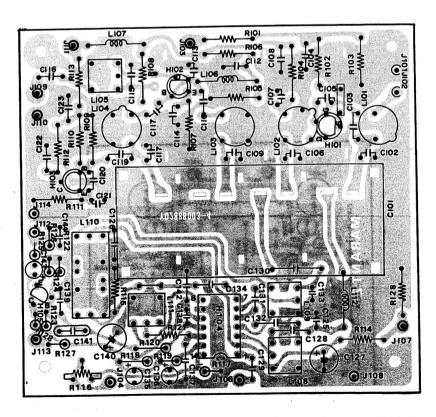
FM IF Amplifier, Detector, Muting Control and Meter Amplifier Unit Assembly P200 Component Locators
